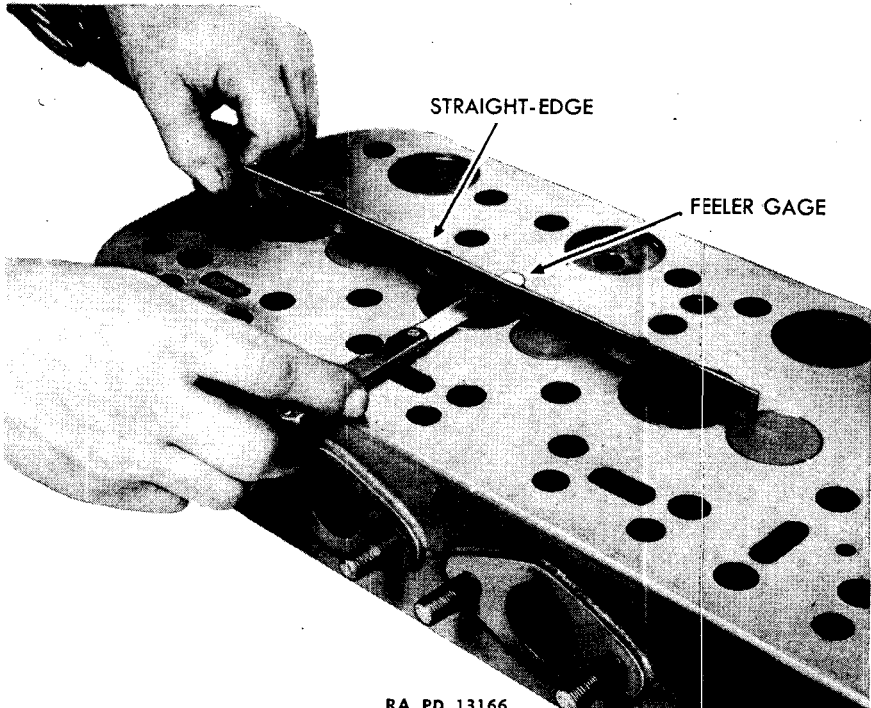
Measuring Valve Head Clearance - (Hercules Diesel)
